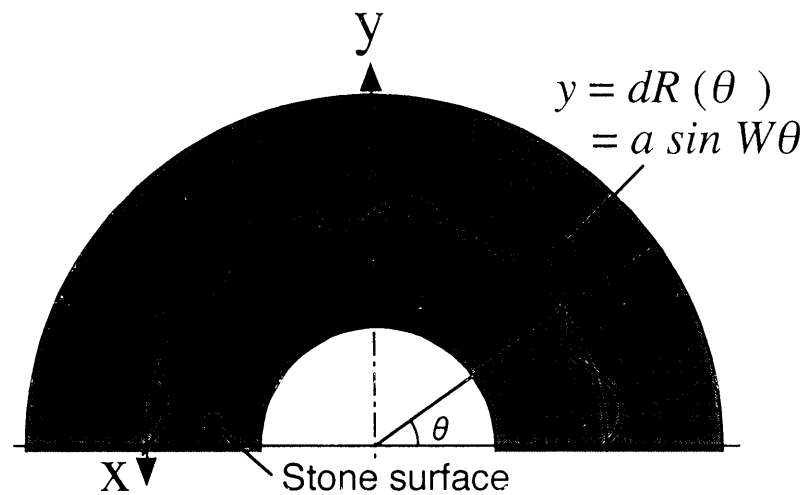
Schematic illustration of expansion of working surface (Plane superfinishing)
